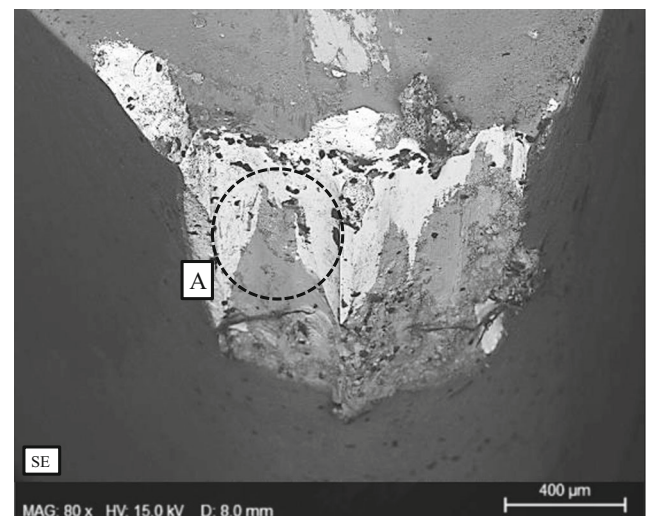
EDS of cutting tool used in turning with the cold air system with cutting speed of 200 m/min, obtained by SE mode
